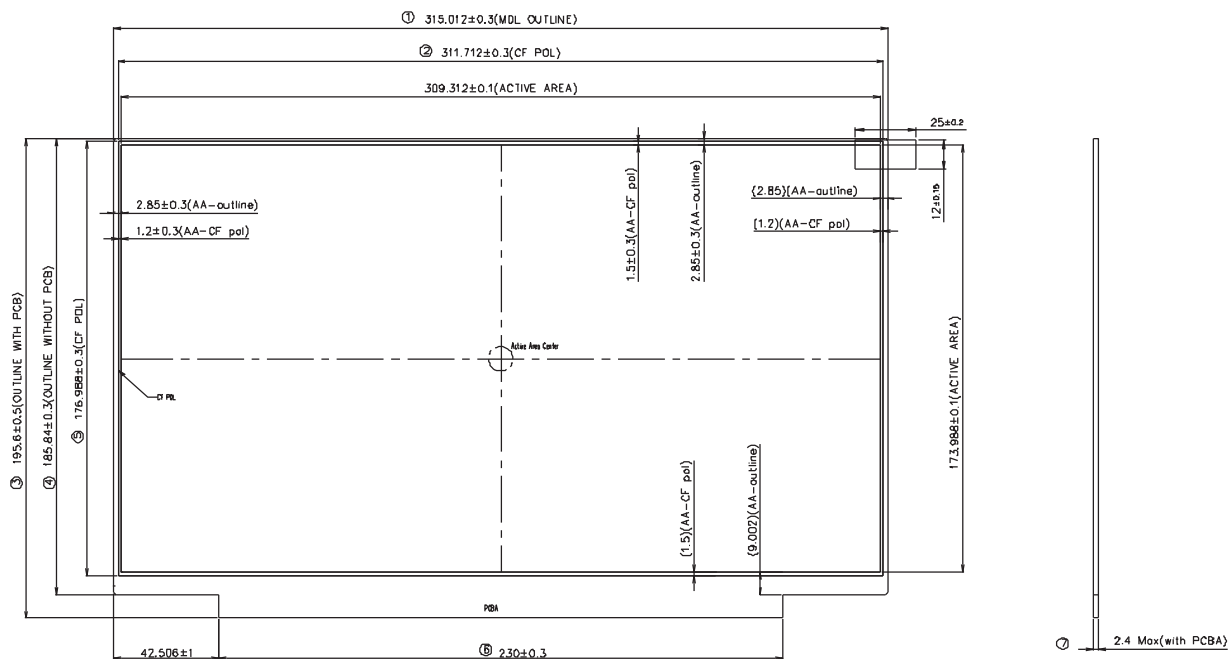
TFT-LCD Module Outline Dimension (Front View)
